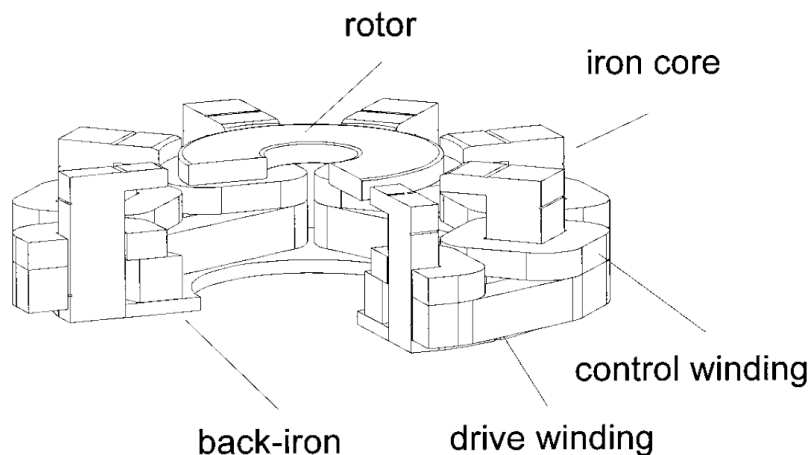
depicts a single magnetic structure including a back-iron, a drive winding, an iron core, and a control winding. *Id.* at 3. The magnetic structure drives the rotor and controls rotor levitation. *Id.* at 2. Bourque explains that “[t]he rotor is passively magnetically levitated in the axial-translational and transverse-rotational degrees of freedom . . . and actively magnetically levitated in the remaining degrees of freedom.” *Id.* at 2–3; *see also id.* at 2 (explaining that “the magnetic suspension (passive in the axial direction, actively controlled in the radial direction) . . . describes the levitation system’s capacity to counteract imposed deviations of rotor position”).
